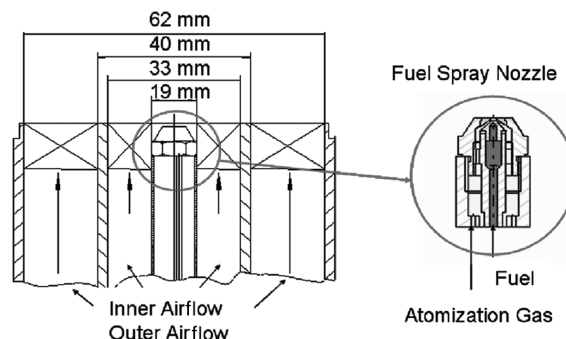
Swirl-stabilized spray burner schematic, showing swirler assemblies and twin-fluid fuel nozzle.
